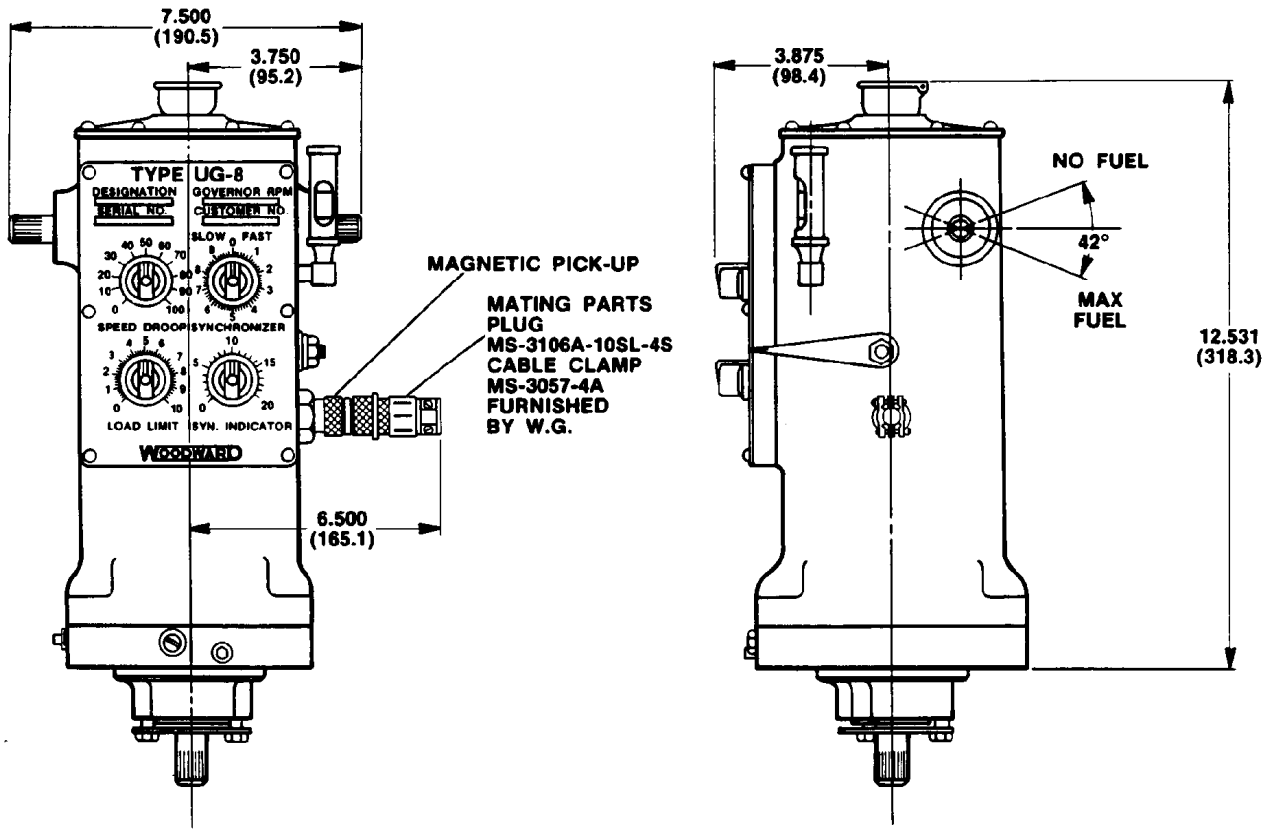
Outline Drawing, UG-8D with Magnetic Pickup
